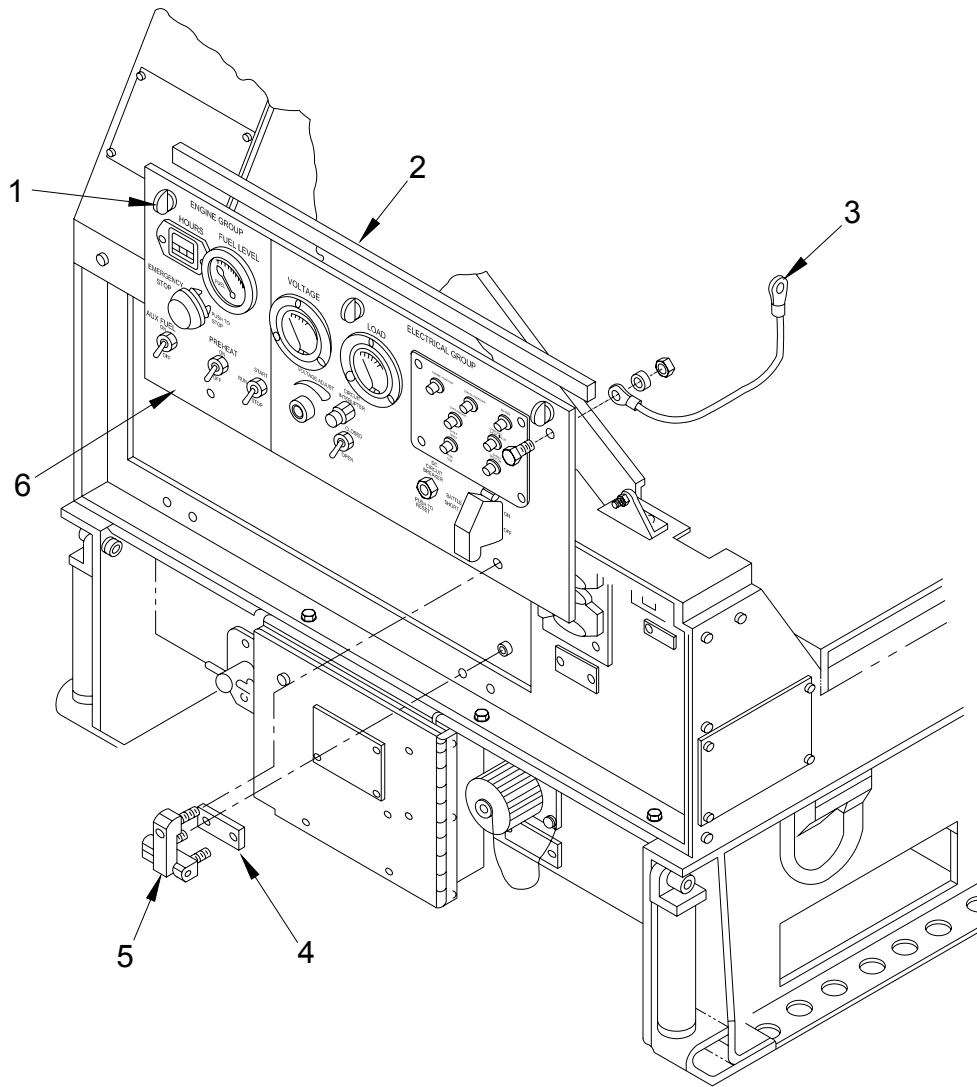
CONTROL BOX ASSEMBLY/LOAD WRENCH ASSEMBLY
